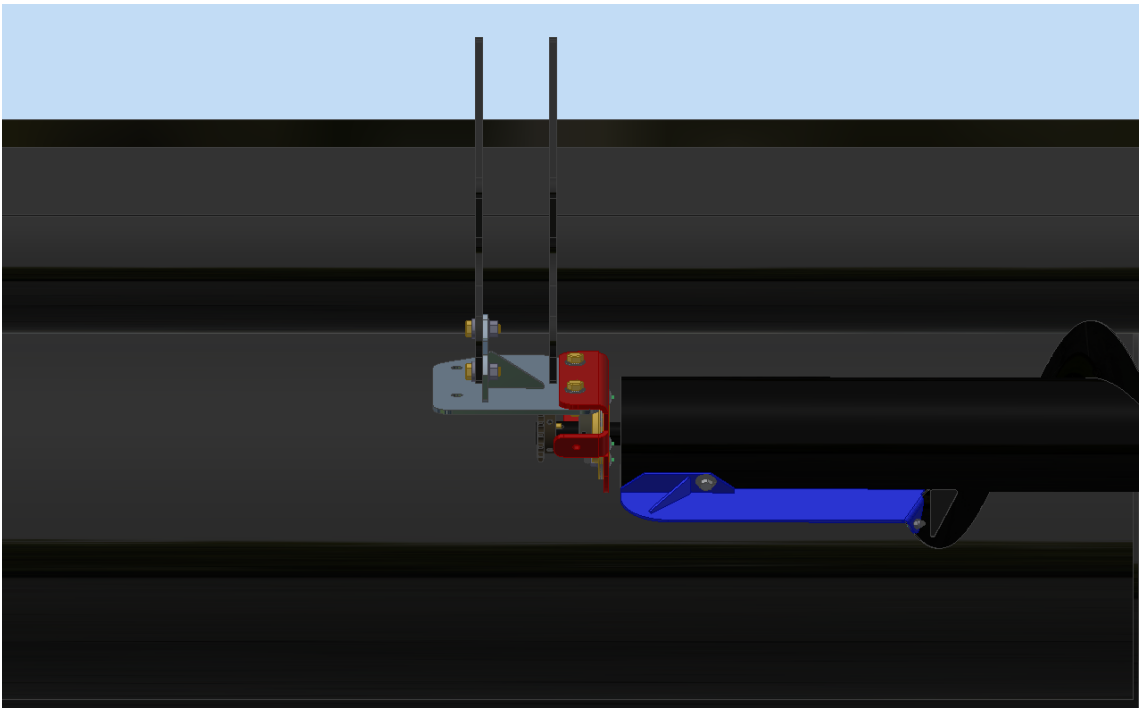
LH AUGER CENTER MOUNT FRONT VIEW
